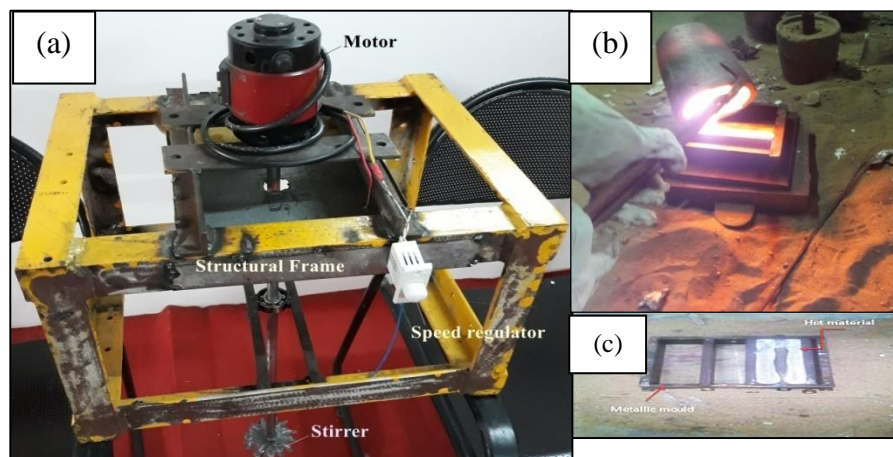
(a) Stir casting setup (b) Pouring of liquid metal (c) developed Al-MMC
